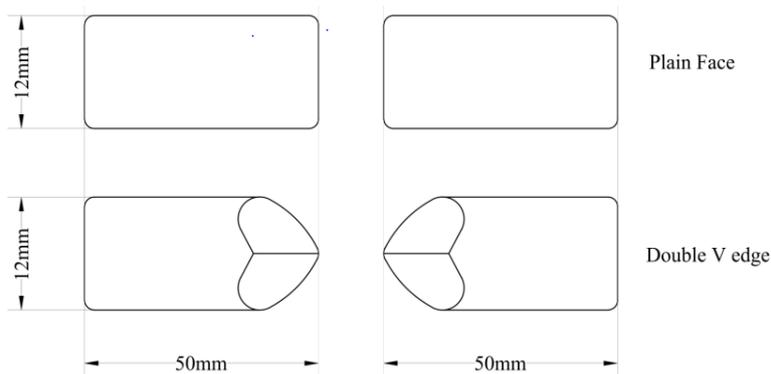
Shapes of the low carbon steel welding samples
